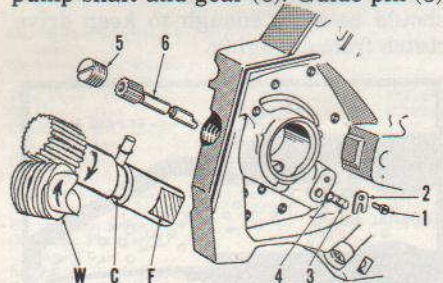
Exploded view of the automatic chain oiler pump. Pump shaft and gear (6) is turned by a worm gear on crankshaft.
